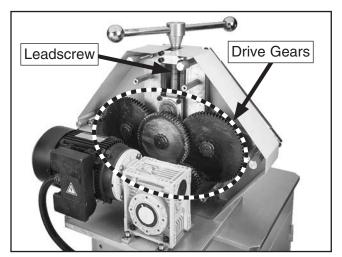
Leadscrew and drive gears exposed for cleaning and lubricating.
